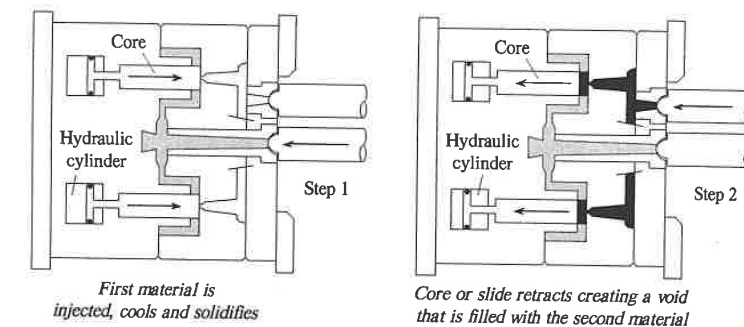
Multi-component injection molding using "core pull" or "core-back" technique. (From *Plastic Part Design for Injection Molding—An Introduction*, Malloy, R. A., (1994), Hanser, Munich, p. 396, Fig. 6.83.)
